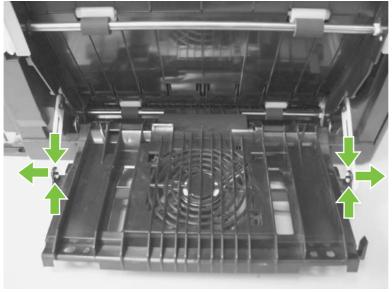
Remove the rear cover and feed guide (simplex product) (6 of 6)
